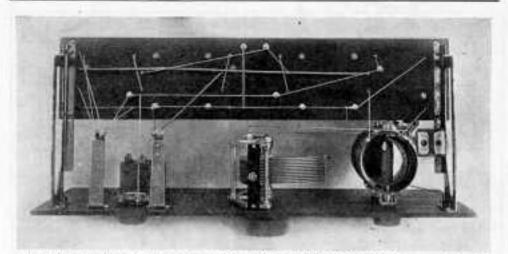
The under side of the tabe panels showing the wiring of the transformers and sockets
